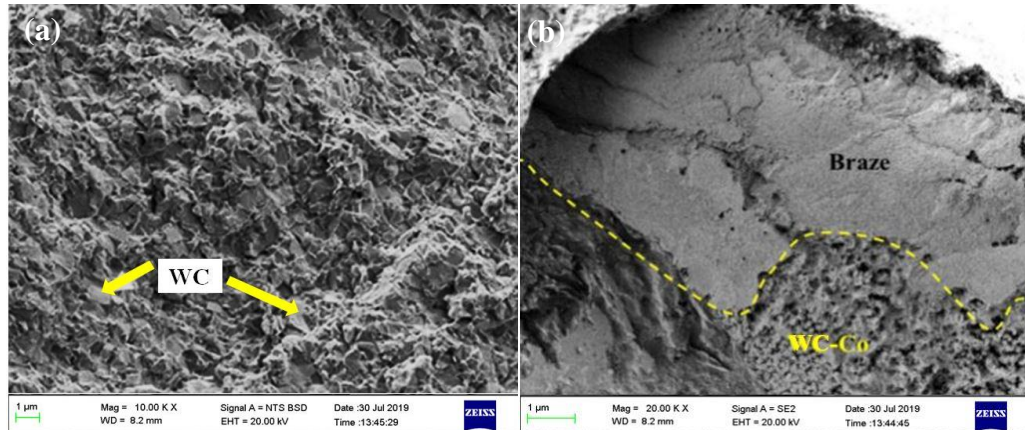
Fracture surface morphology of WC-6wt%Co brazed joints fabricated at 710°C for 30 s, with 24 μm interlayer thickness.
